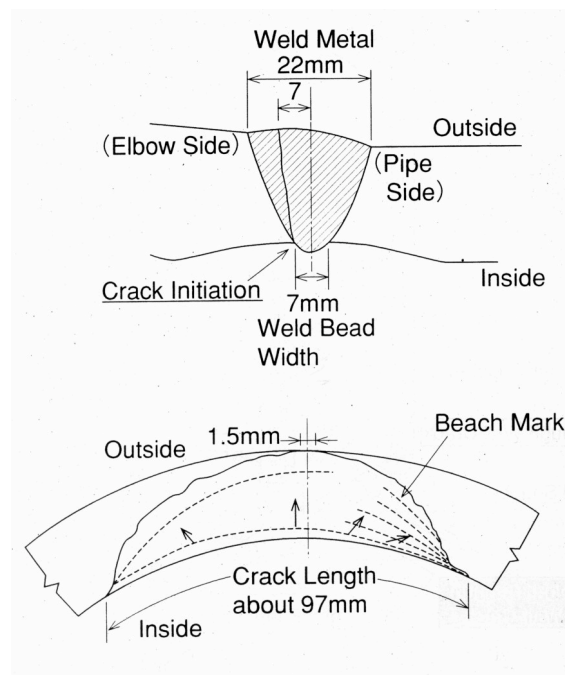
Illustration of a thermal fatigue crack in a weldment (Shirahama, 1998).
